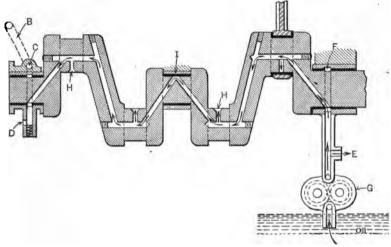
Force-feed lubrication to force oil to main bearings and crank-pin bearings.
